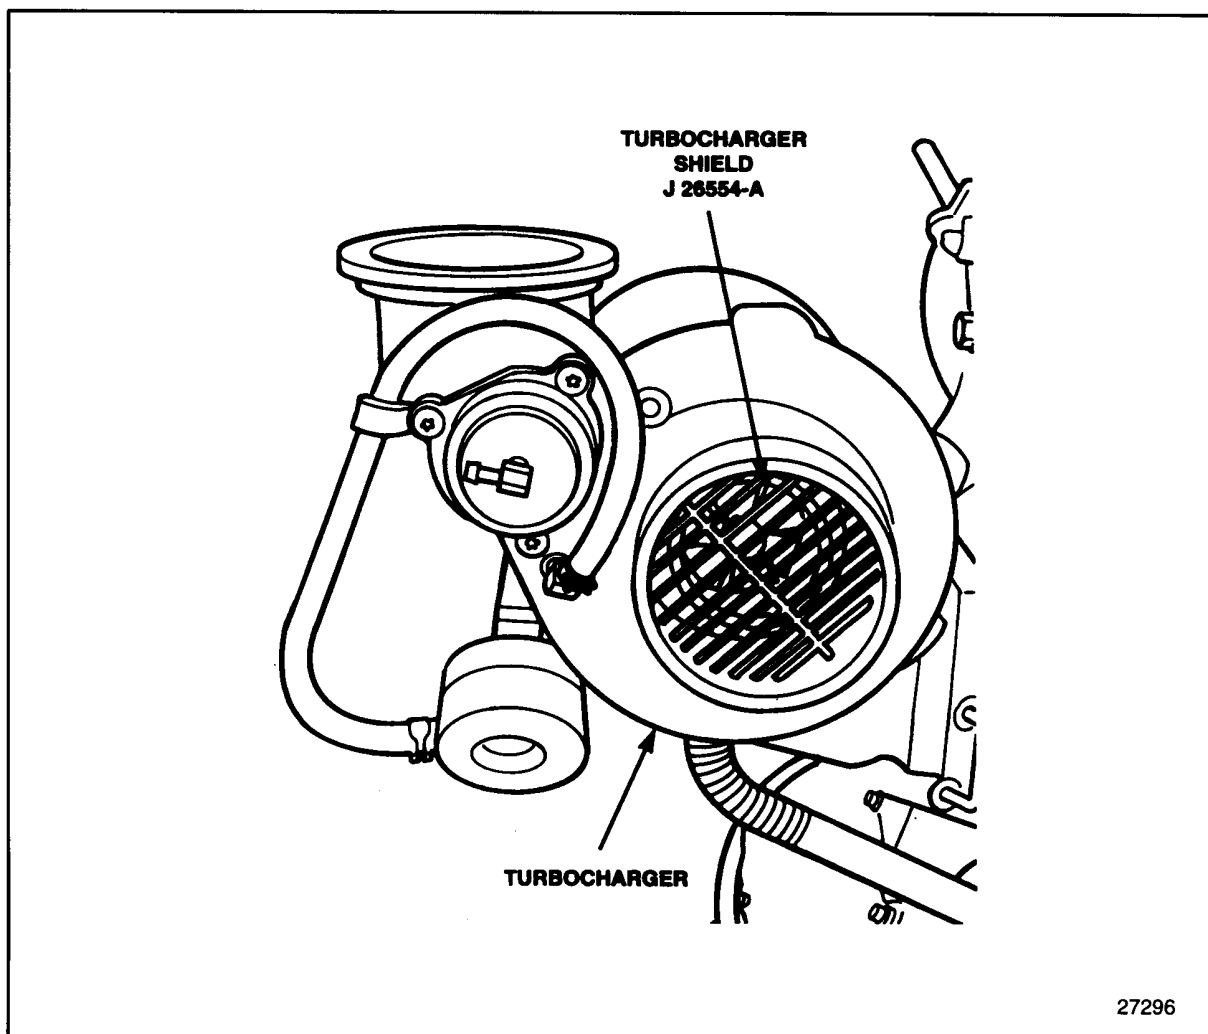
Turbocharger Compressor Inlet Shield, Series 50G
